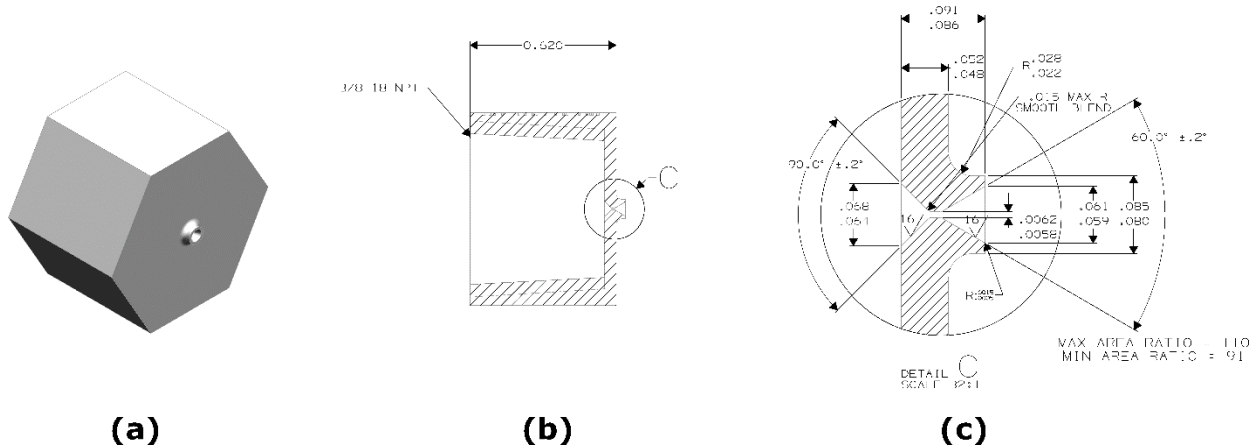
Details of nozzle used in laboratory-scale resistojet experiments, including: (a) 3D drawing; (b) cross-section; and (c) nozzle dimensions.
